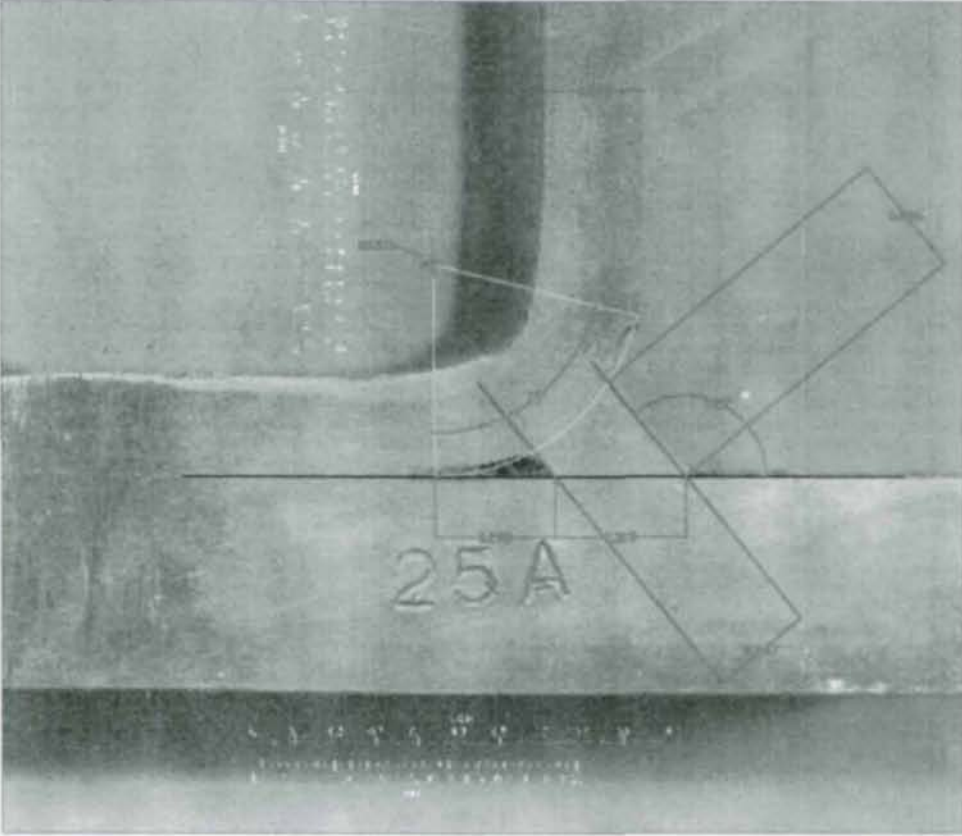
Typical Data Sheet for Measured Weld Dimensions of a Flare-V Weld
